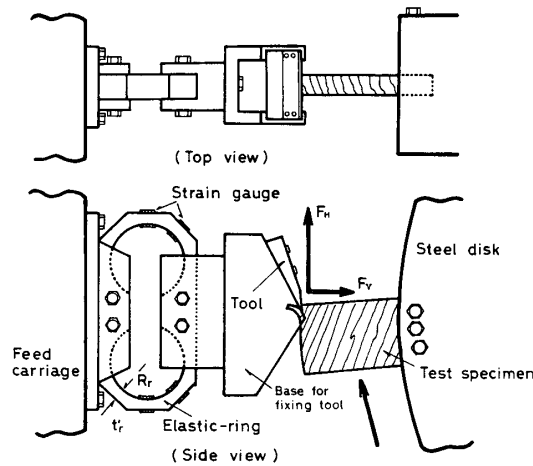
Close-up view of experimental apparatus and method for measuring cutting force components.
